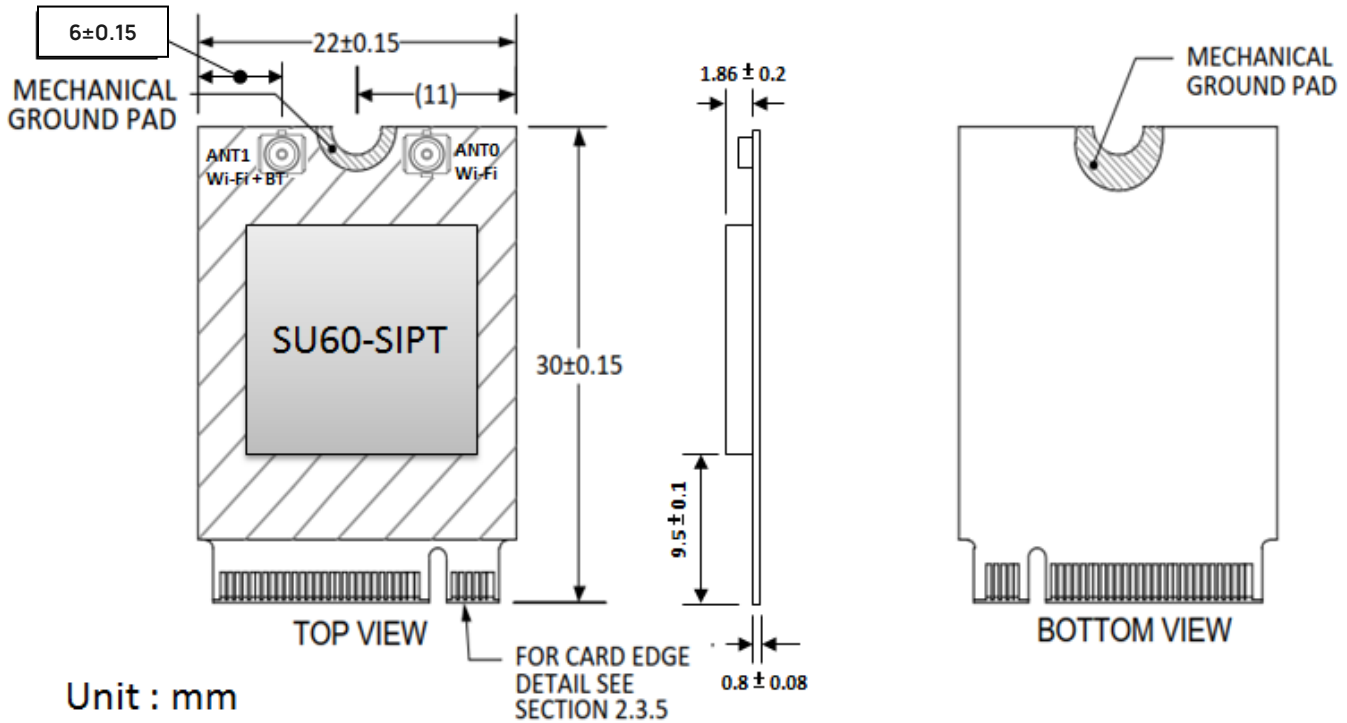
Module dimension of ST60-2230C-P/ST60-2230C-PU
